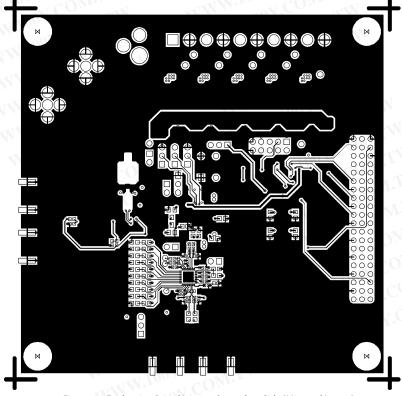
Evaluation Board Layout, Secondary Side (Mirrored Image)
